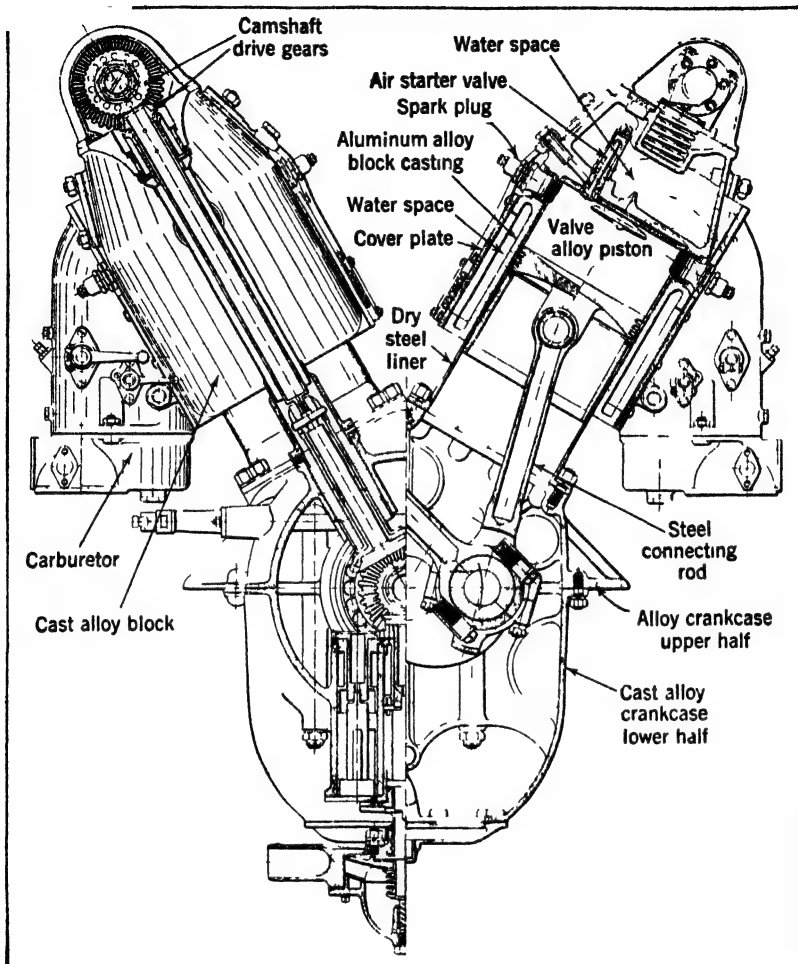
Transverse Sectional View of Hispano-Suiza Aviation Engine, Showing How Steel Liner is Installed in Cast Aluminum Alloy Cylinder Block. This Type of Construction is Known as a "Dry Liner" Because no Water Comes in Contact with it. Note, also, Crankcase Construction.
